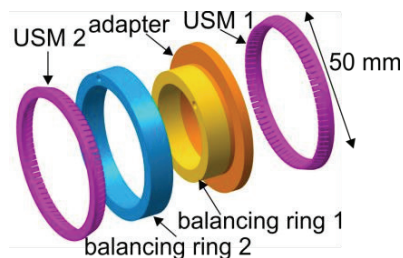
Exploded drawing of the two USM with the corresponding balancing rings and an adapter.
